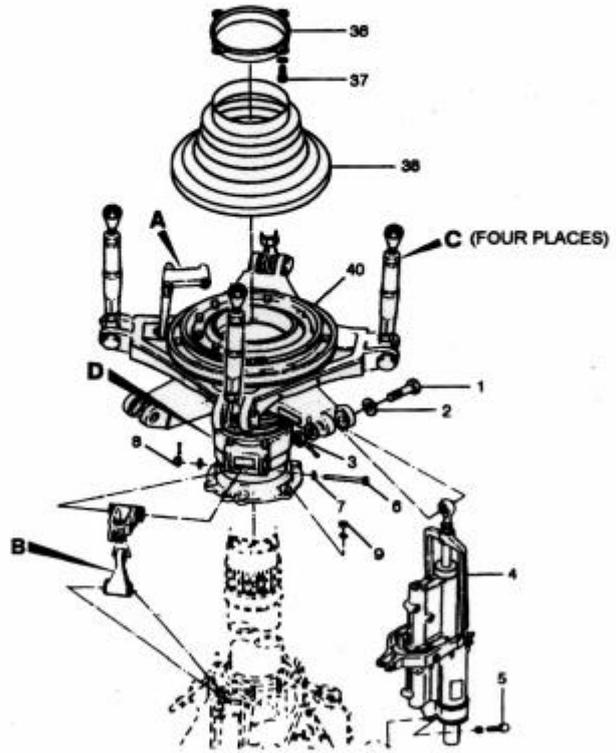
(Sheet 1 of 3) Rotating Controls
